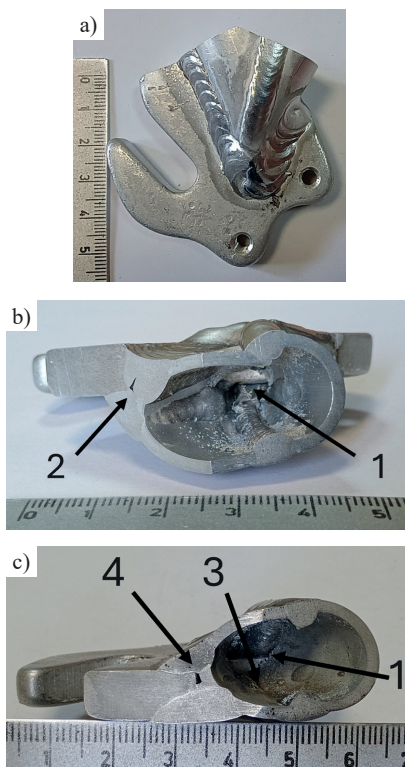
MIG connection of pipes with a wall thickness of 2 mm with an 8 mm casting: a) weld faces of joint 1; b) cross-section of joint 1; c) cross-section of joint 2 (description in text)
